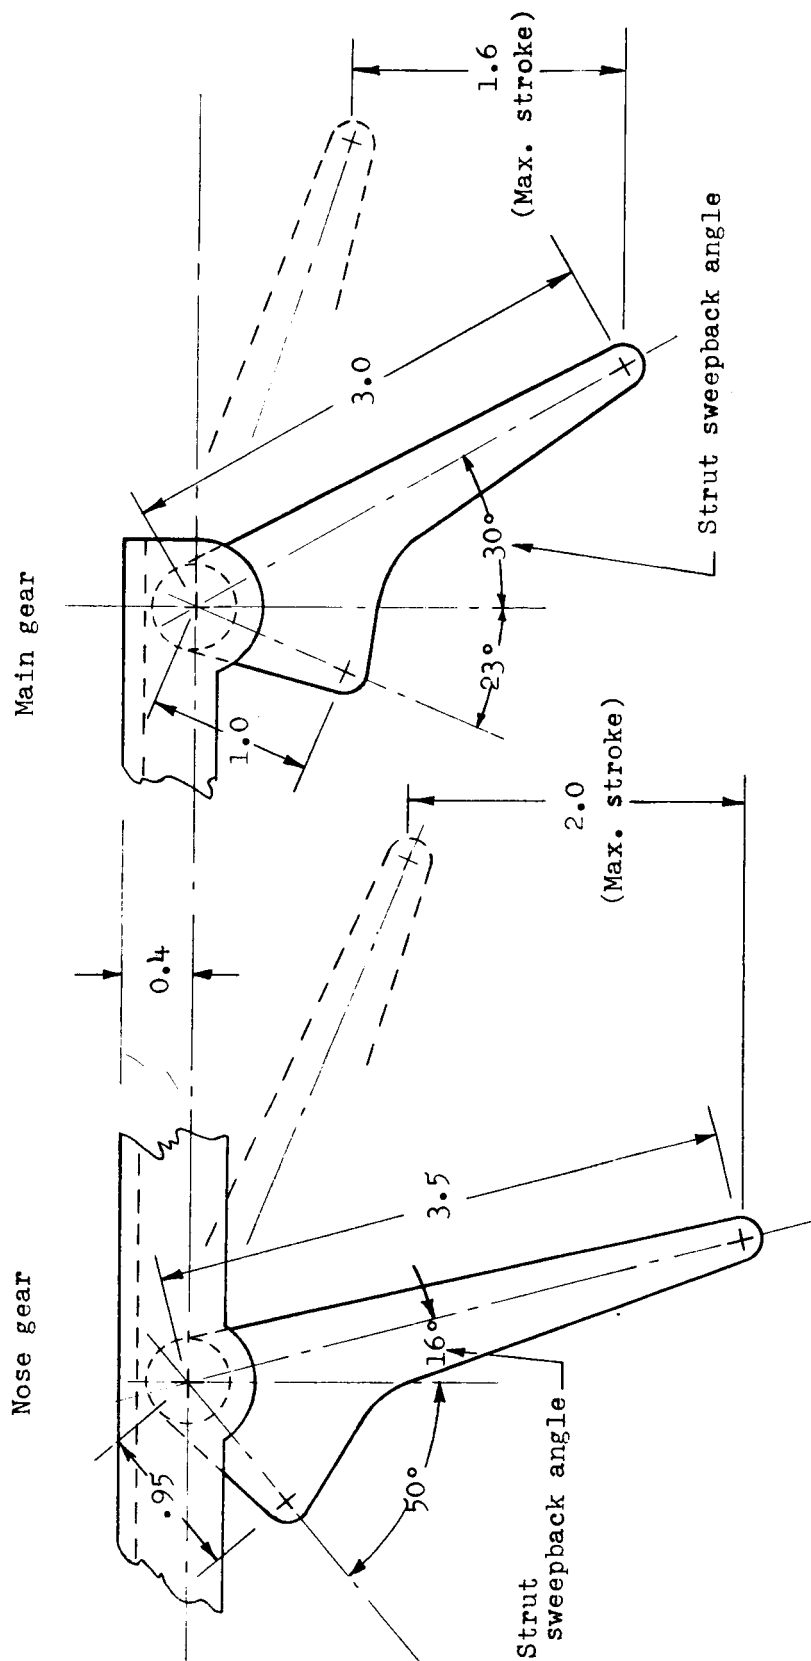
Details of modified model landing-gear struts. All dimensions are in inches.
